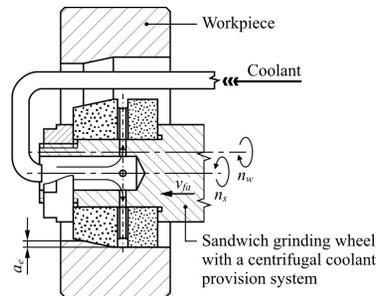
Cross-section of the grinding zone using sandwich grinding wheel [10]
